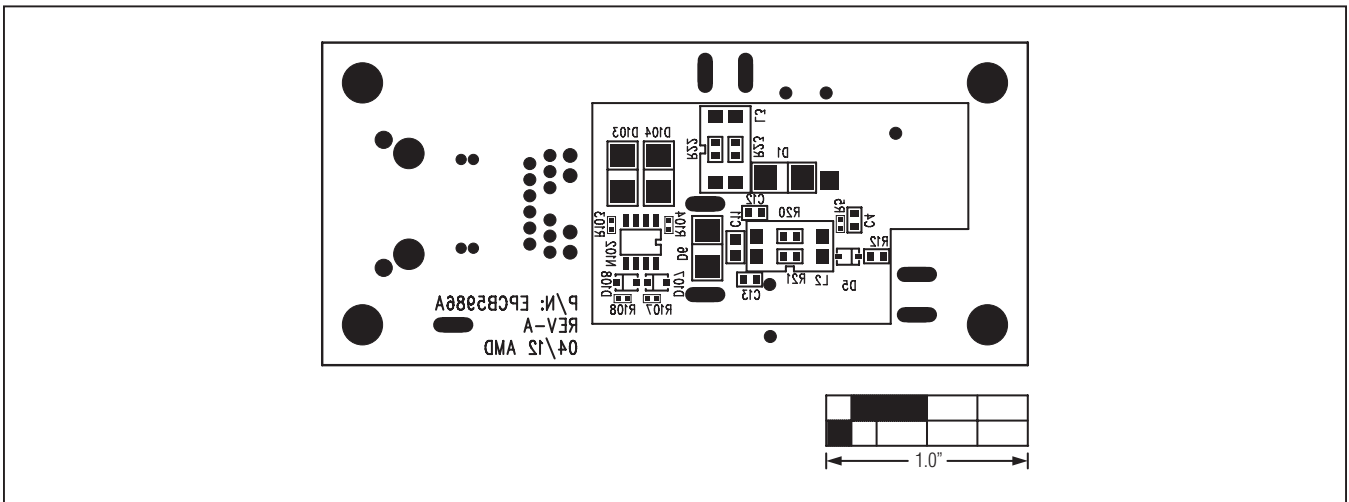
MAX5986A EV Kit Component Placement Guide—Solder Side
